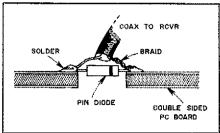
One method of attaching the PIN diodes to the double-sided pc board is shown here. Details are given in the text. The coaxial cable leads to the diode should be no longer than approximately 5 mm (0.2 in.).
